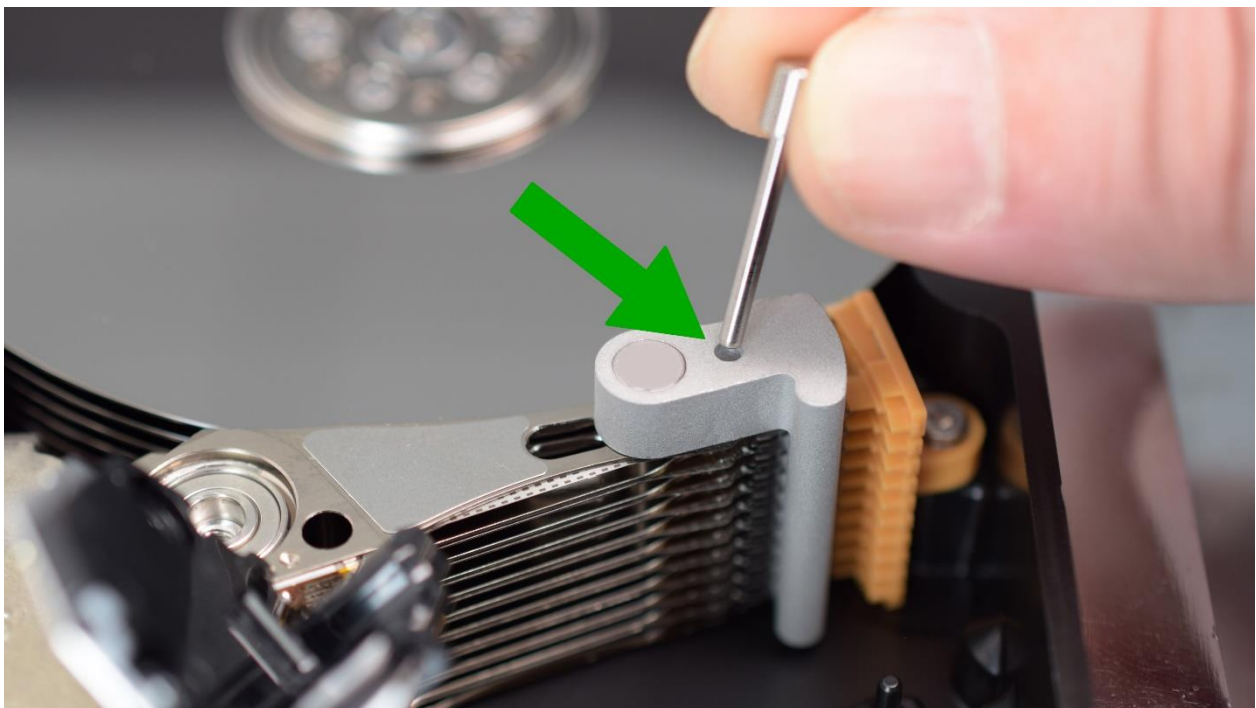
Inserting the tool shaft into the corresponding hole on the HAS)
